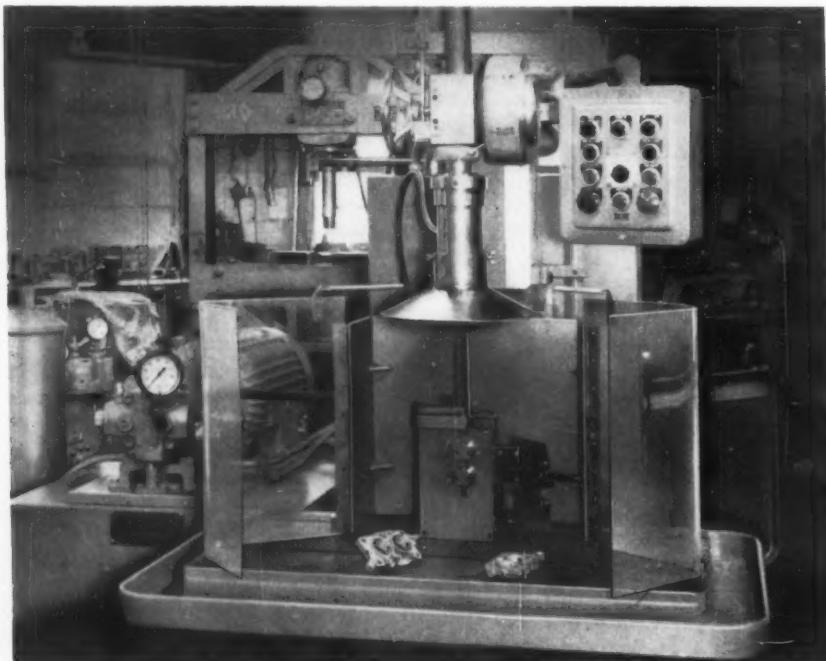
Holes for throttle-valve shafts are gun-drilled in these carburetor parts. A minimum gap is maintained between the guide bushings and the work-piece.
